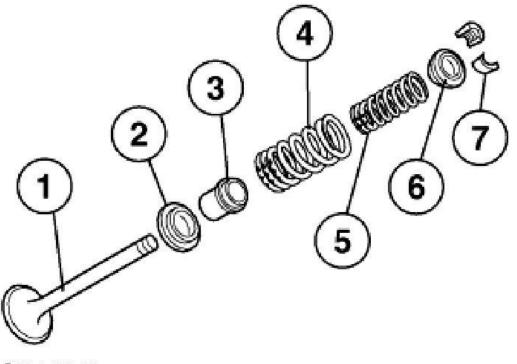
Identifying Valve Springs Courtesy of BMW OF NORTH AMERICA, INC.
